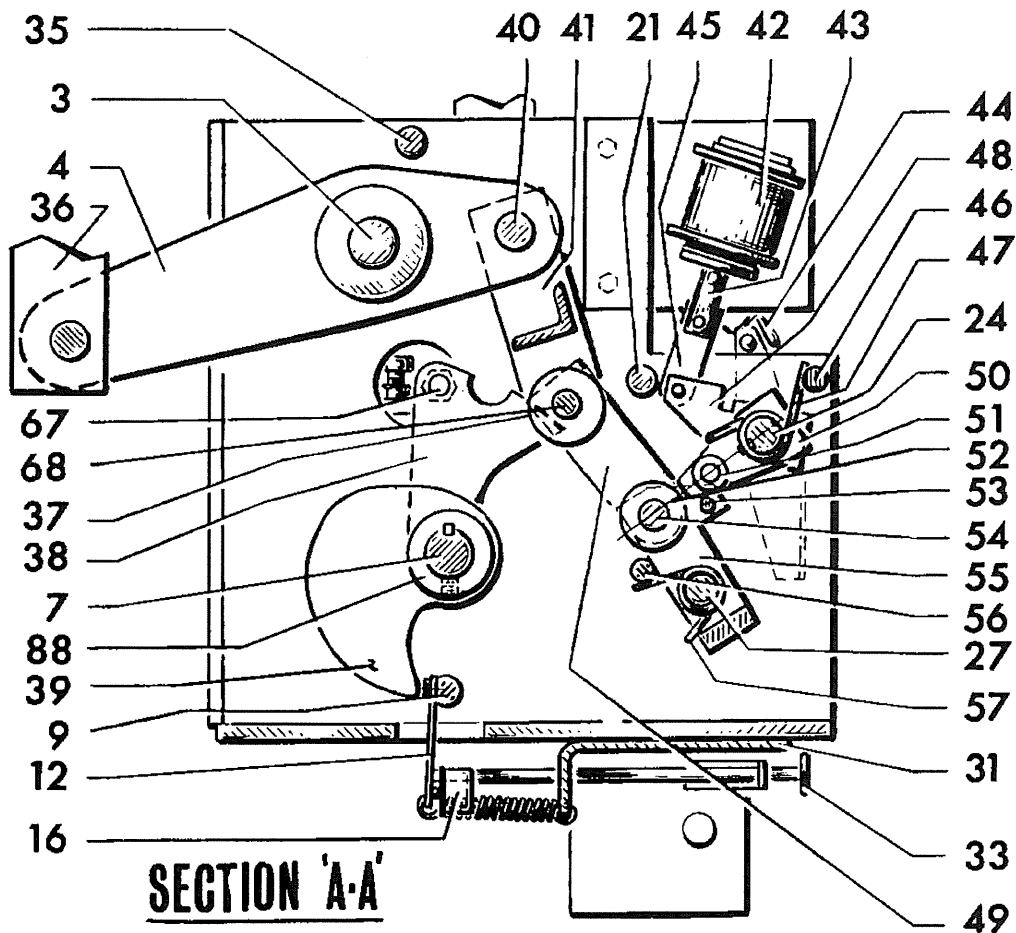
(0832D0149 Sheet 2, View J Rev. 1)
